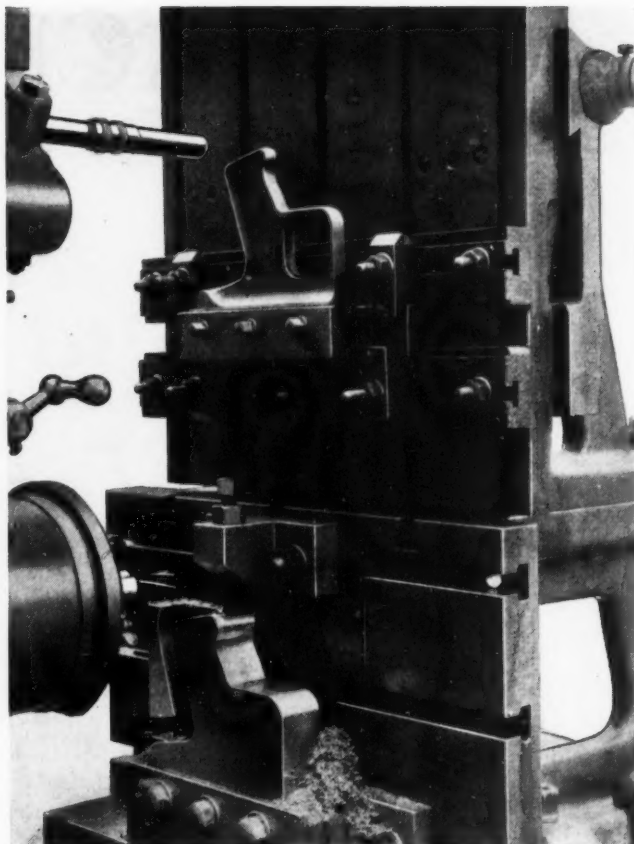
(Above) The Automatic Tool-room Machine Provides a Convenient Means of Reproducing Parts Experimentally before Expensive Dies are Made for Their Manufacture on a Production Basis
